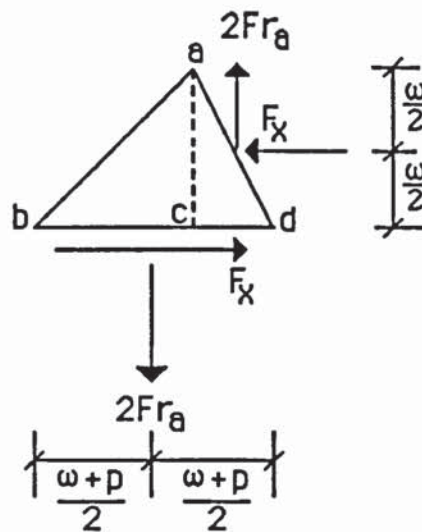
Vertically and horizontally balanced weld abcd.
